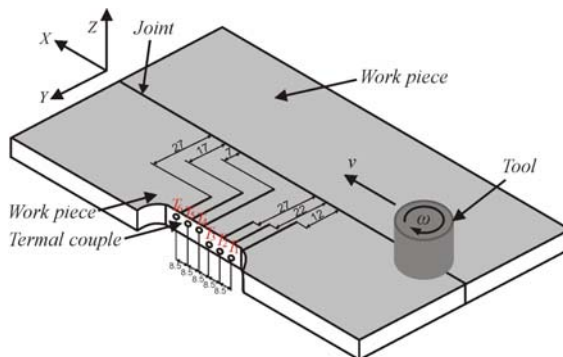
Scheme measuring points of temperature in welding work piece [5]
